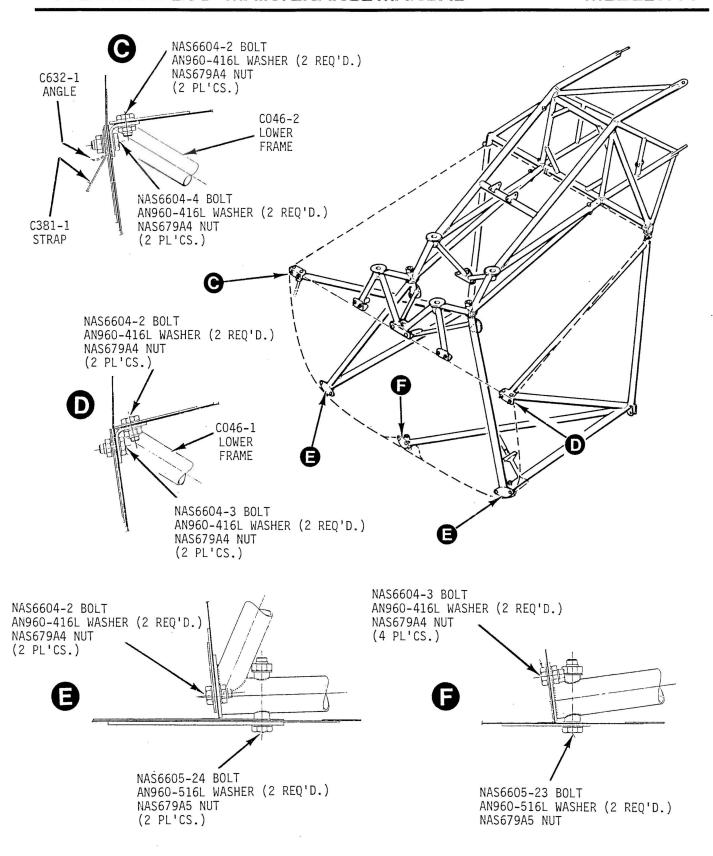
A STEEL TUBE FRAME INSTALLATION
